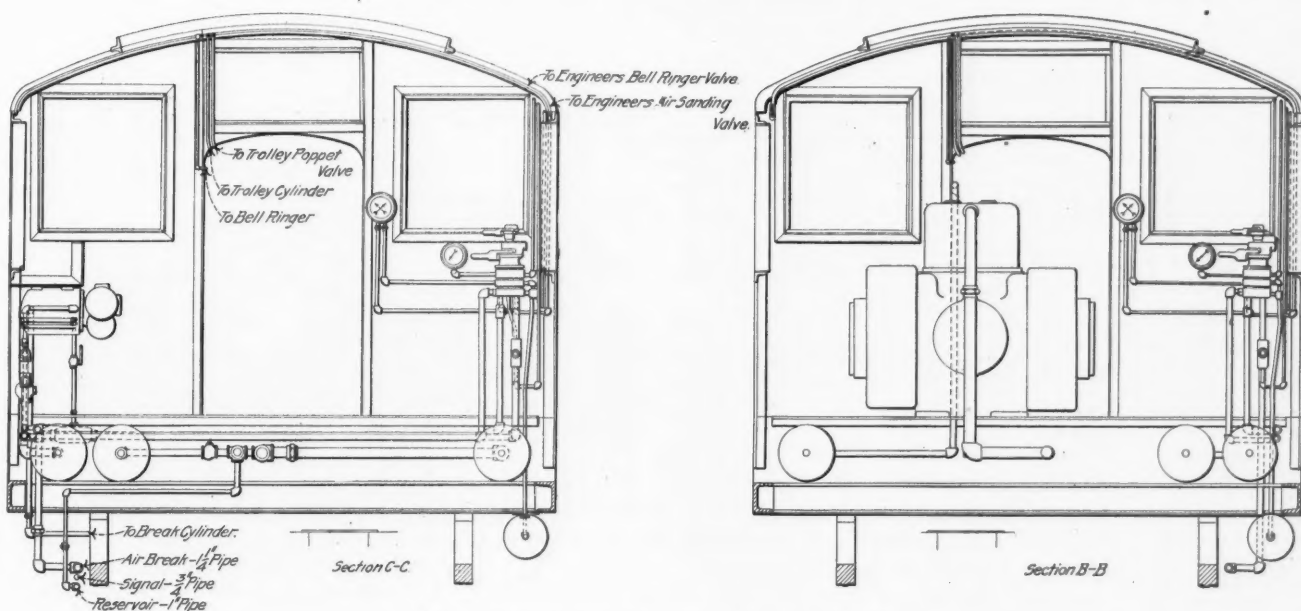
Air Brake and Auxiliary Piping; End Views.
